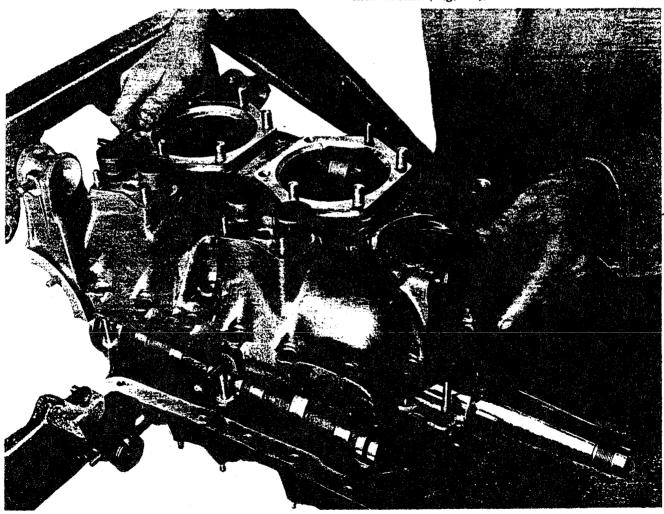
Installing Crankcase 1-3 over Crankcase 2-4.
